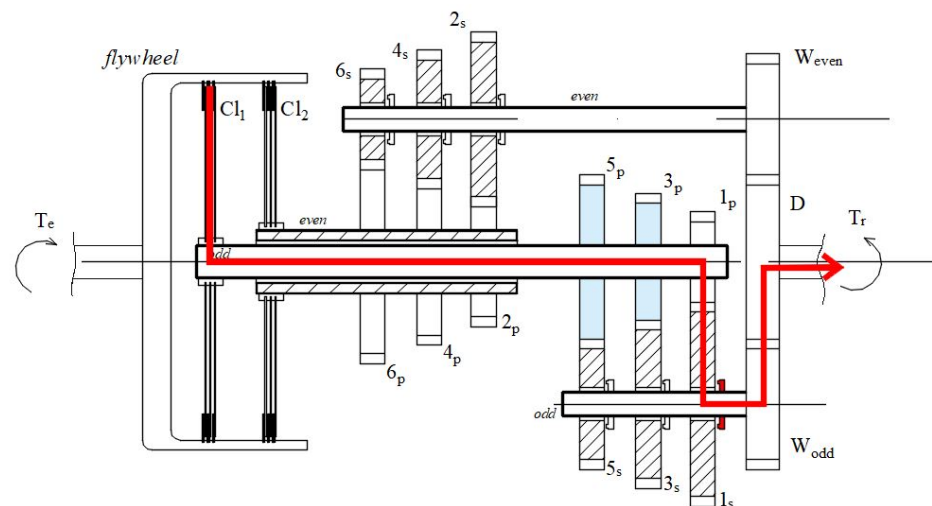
The DCT gear shifting transient: 1st gear synchronised.
